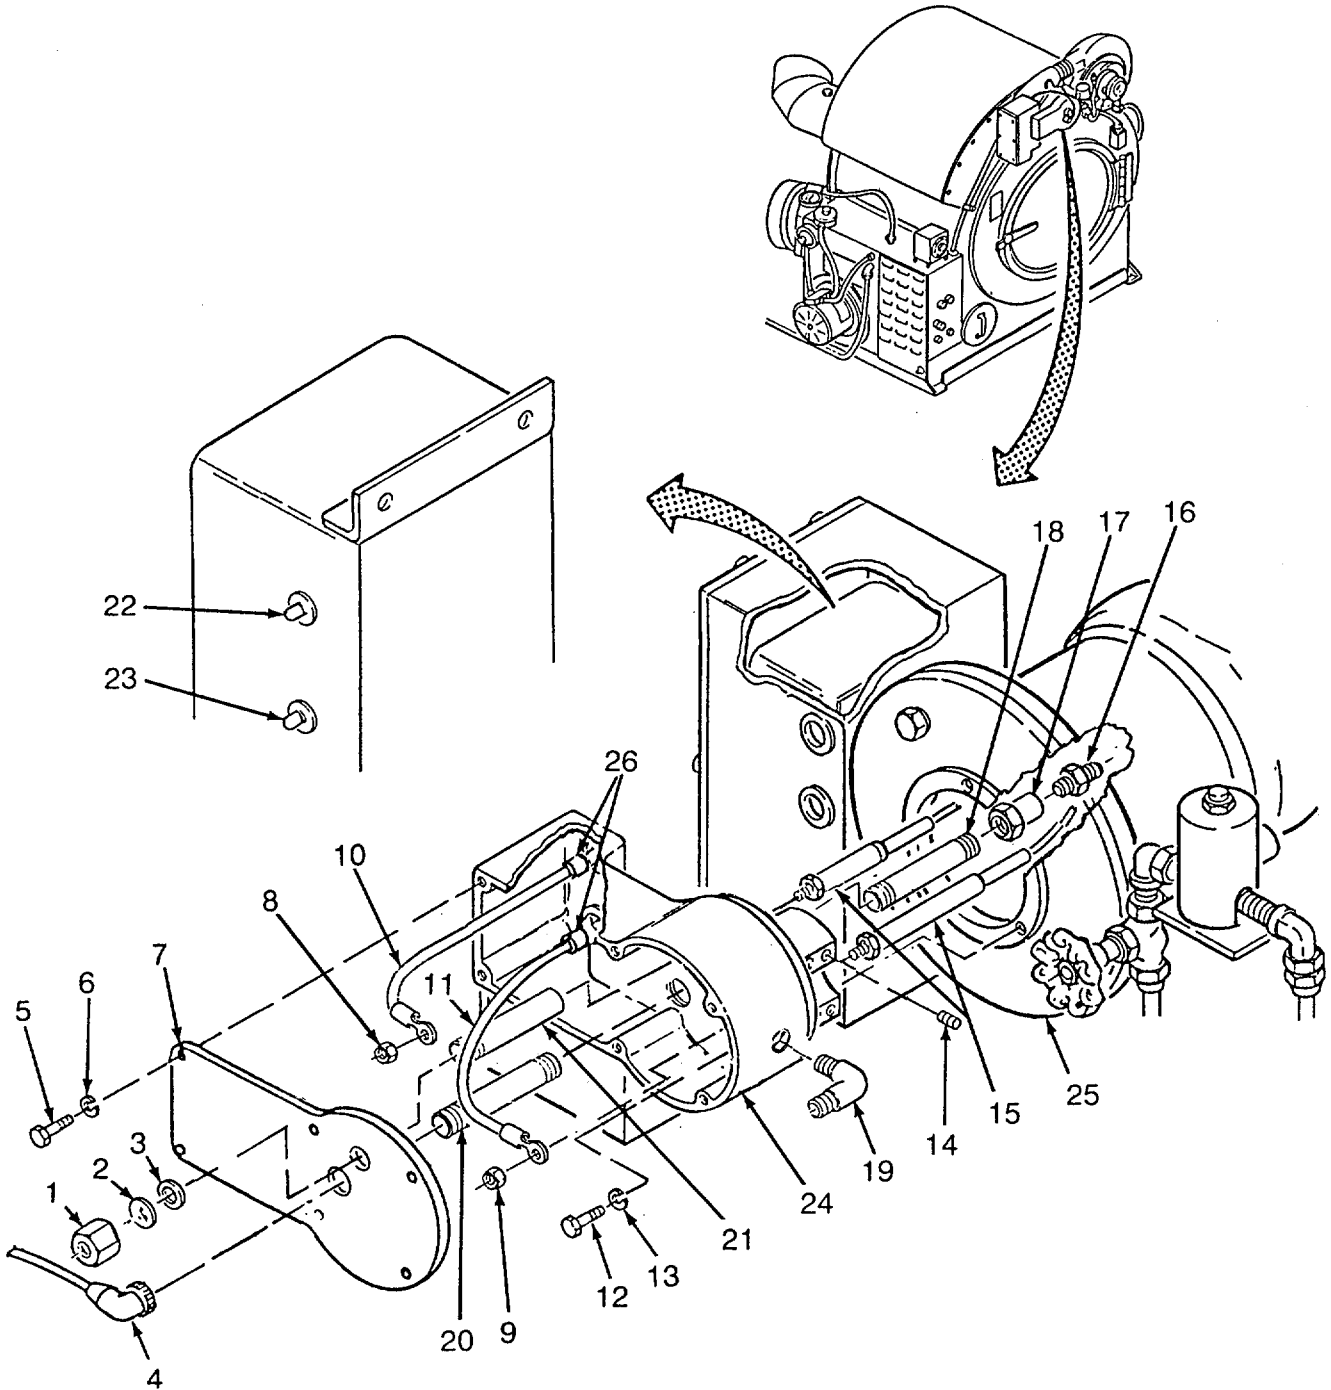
Ignition Cables, Sight Eye, Nozzle, Fuel Piping and Electrodes (Sheet 1 of 2)
